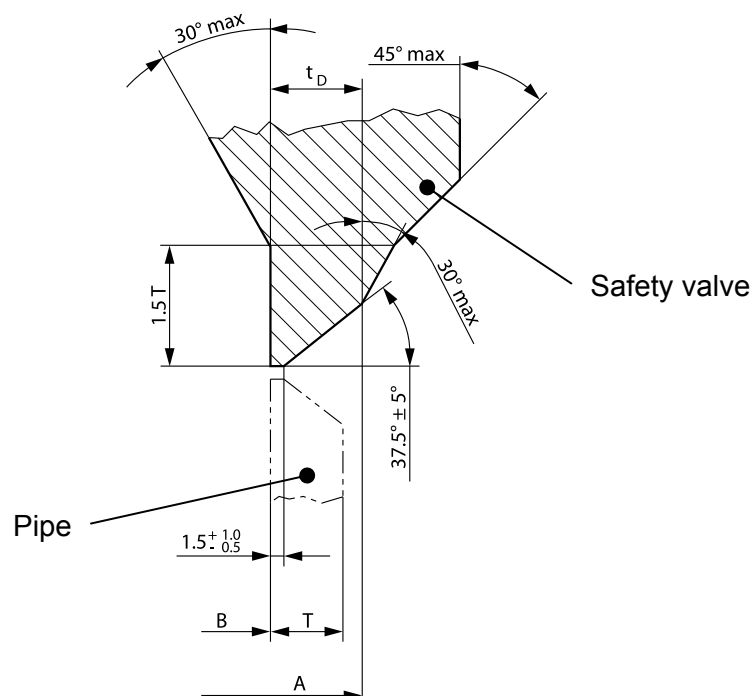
Welding end with single v weld for connection of pipe with wall thickness up to 22 mm
